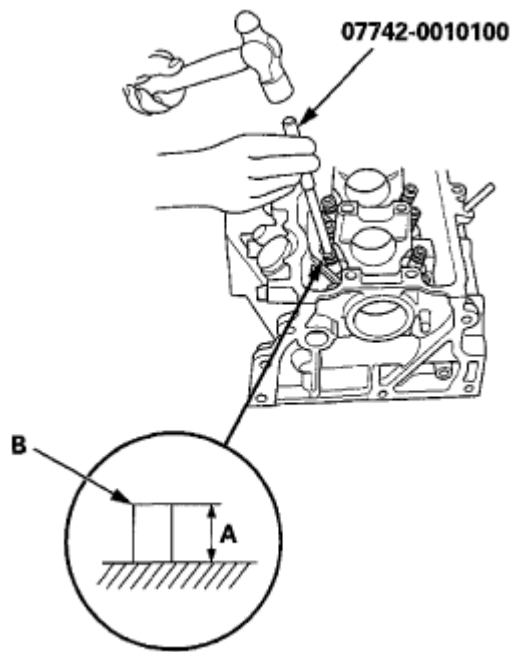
Driving Guide In To Specified Installed Height Of Guide
